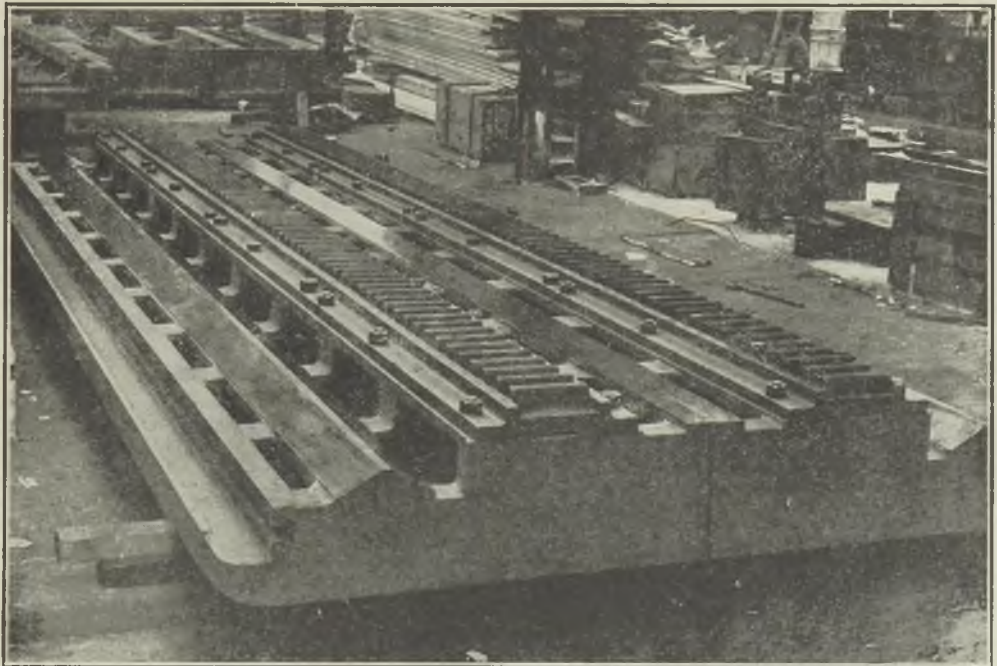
REDESIGNED PLANING MACHINE BED.
